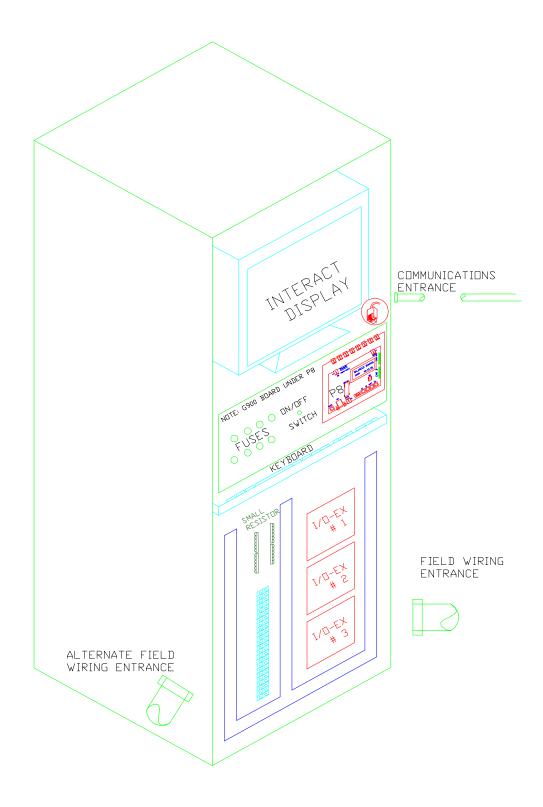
Typical G900 XL Controller Wiring Layout
